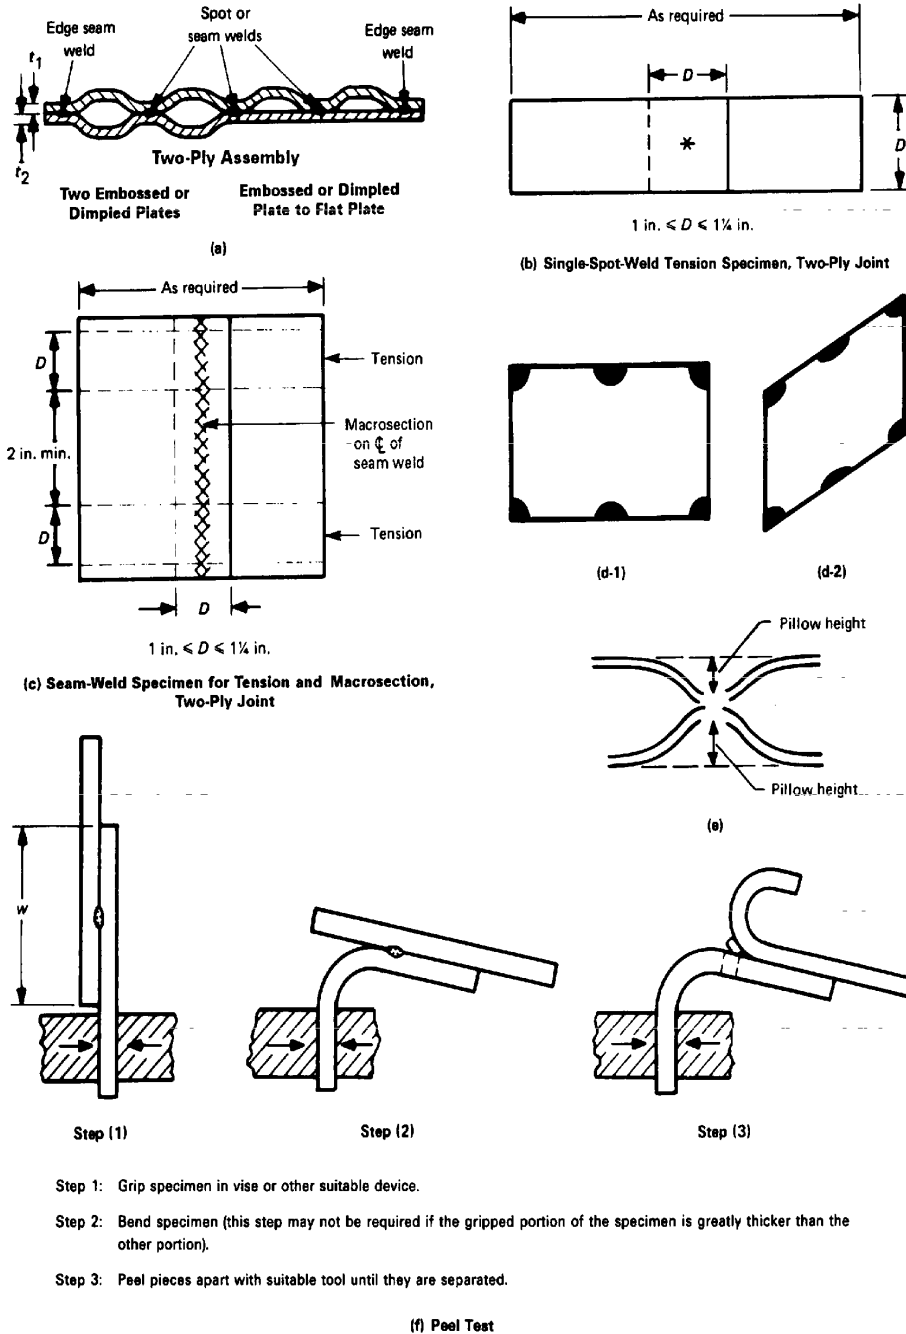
TWO-PLY JOINT ASSEMBLIES
